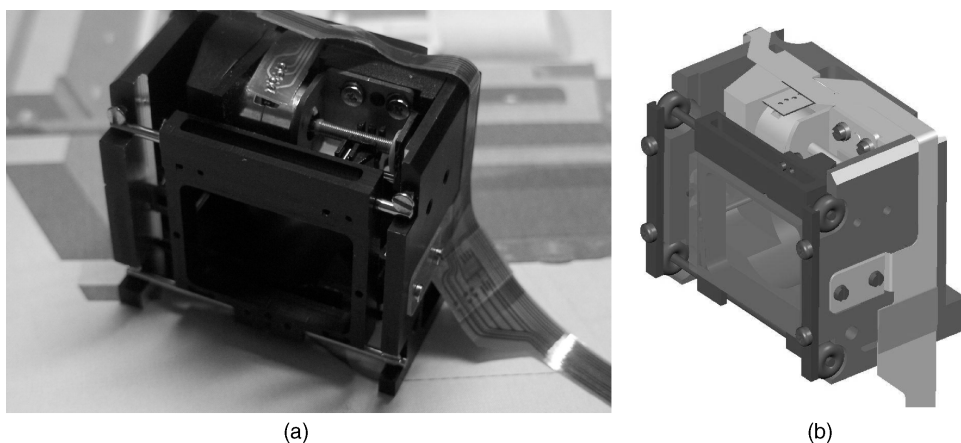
(a) Photograph and (b) CAD drawing of phase mask and mechanism
